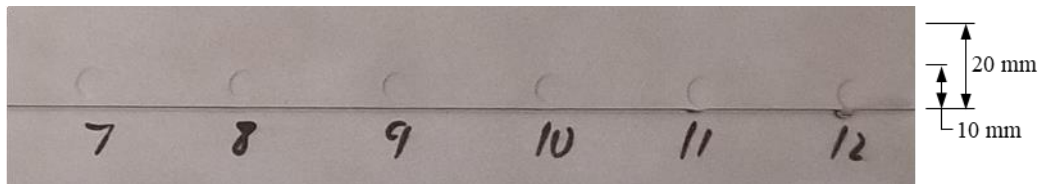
Ductibor[®] 1000-AS 1.6 mm quasi-static specimen #4 showing worse-case spot weld nugget to edge distance.
